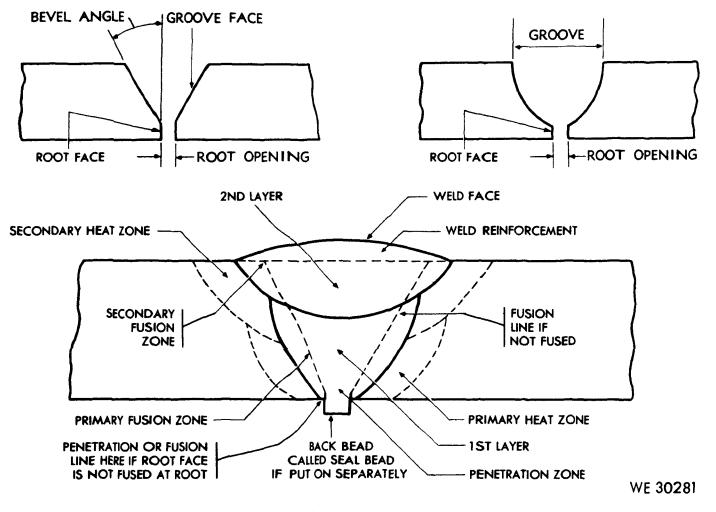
Heat affected zones in a multipass weld.
